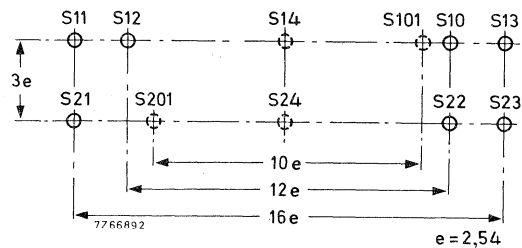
Hole pattern of the printed-wiring board for a tandem potentiometer (viewed on component side)
